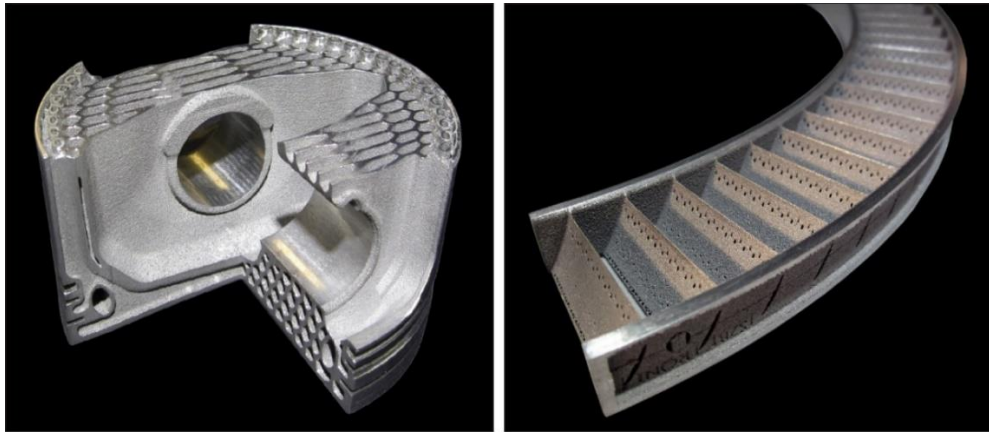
Aluminum piston head (left) 3D printed from a 2024 aluminum alloy developed by Elementum 3D and aluminum stator vane (right) 3D printed from a 6061-aluminum alloy developed by Elementum 3D. The parts demonstrate the printability of 2000 series and 6000 series aluminum alloys for complex parts with internal cooling channels and no evidence of cracking.
